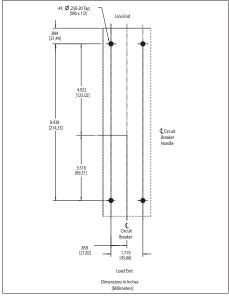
Circuit Breaker Mounting Bolt Drillling Plans.
